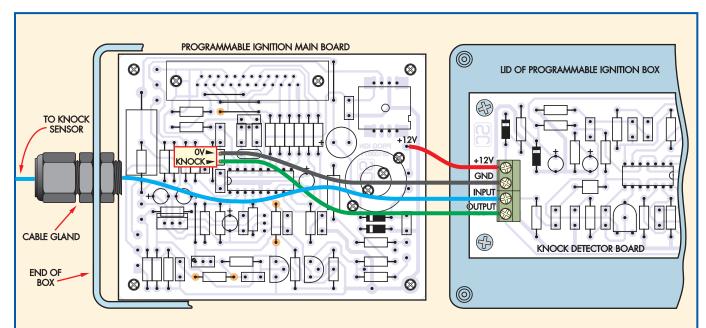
the Knock Detector PC board mounts on the case lid of the Programmable Ignition Timing Module and is wired to the main board and to the knock sensor as shown here.
